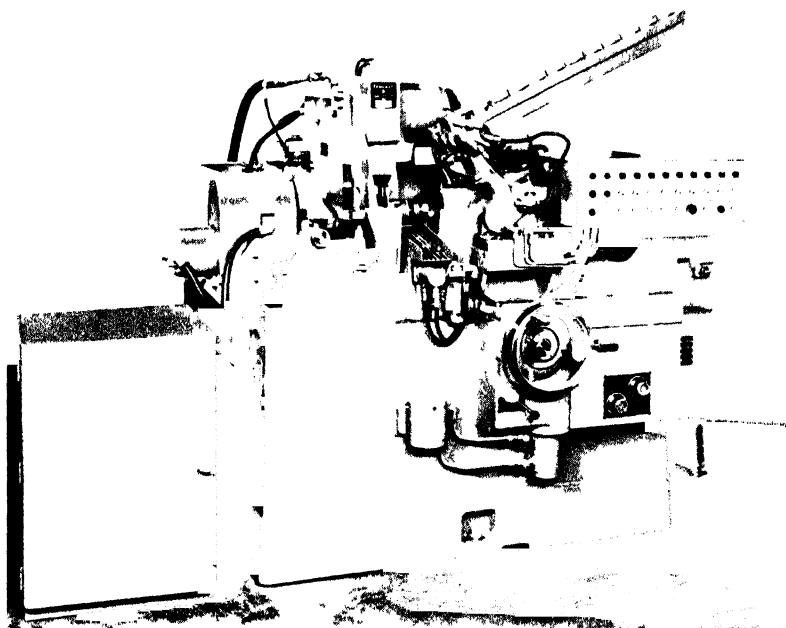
A fully automatic machine with automatic loading and machining size controlled by electronic gaging.
